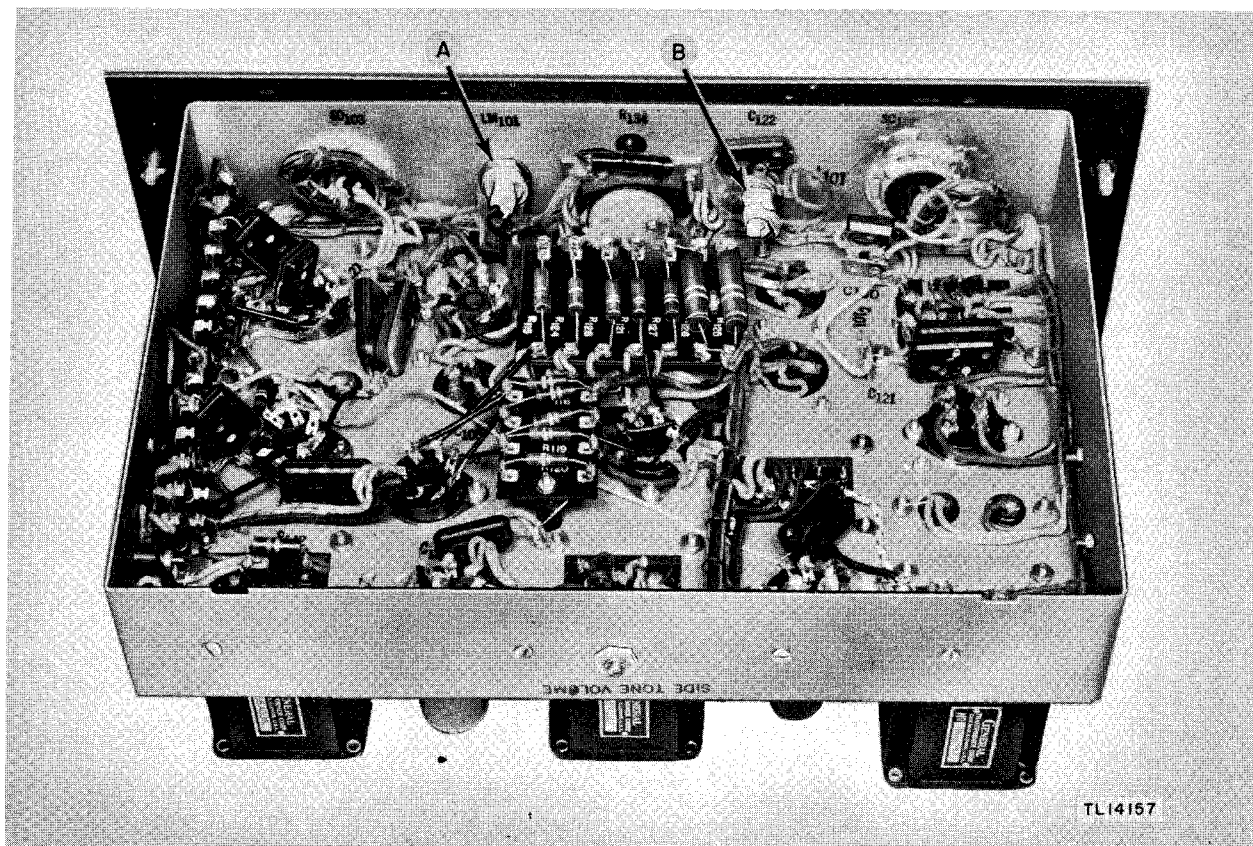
Speech Amplifier BC-614-E—bottom interior view of chassis, showing method of masking.
